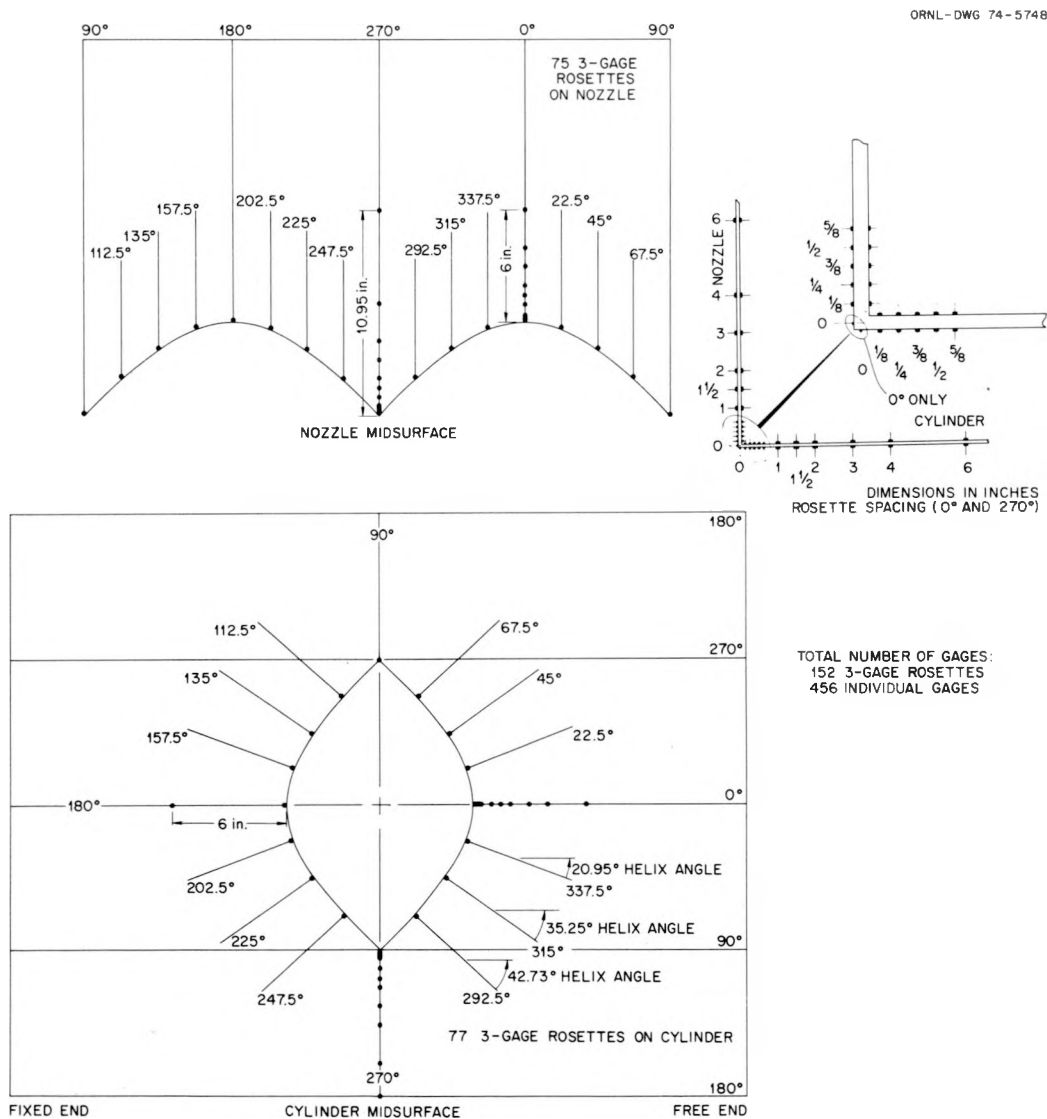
Strain-gage layout for the cylinder-to-cylinder Model 2. (For conversion to SI units, 1 in. = 2.54 cm).
